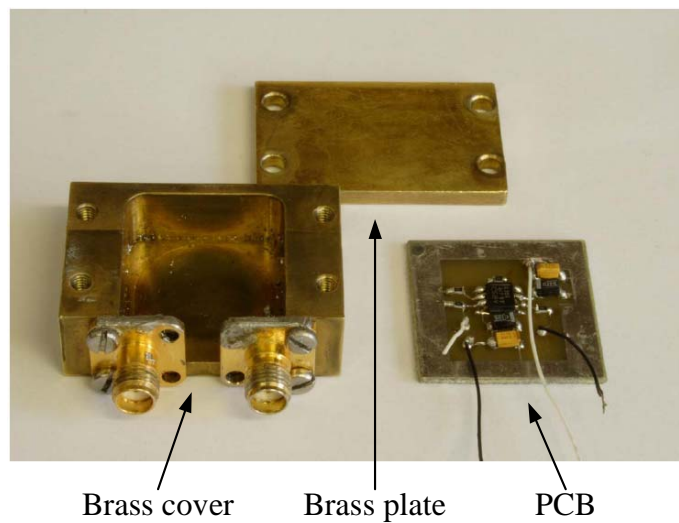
Photograph of the brass cover, the PCB and the brass plate used to connect the PCB to the cold finger.
